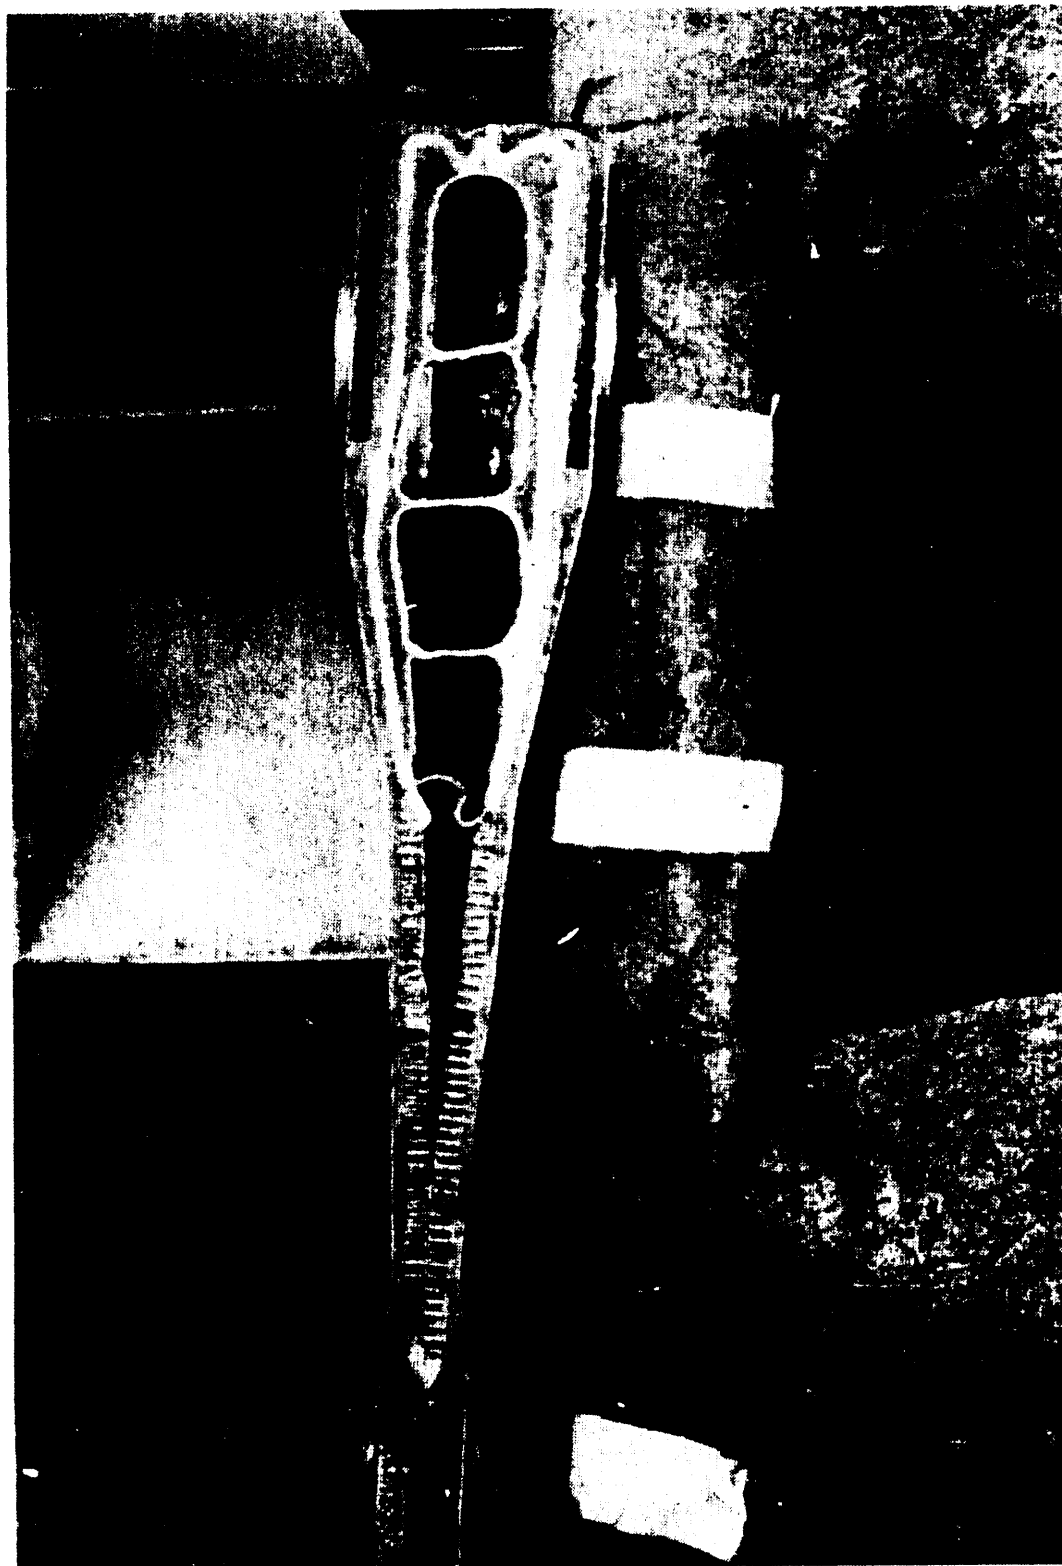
Multi-tubular spar helicopter main rotor blade.
